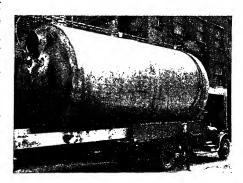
Fusion welded copper tank for acetic acid storage.
